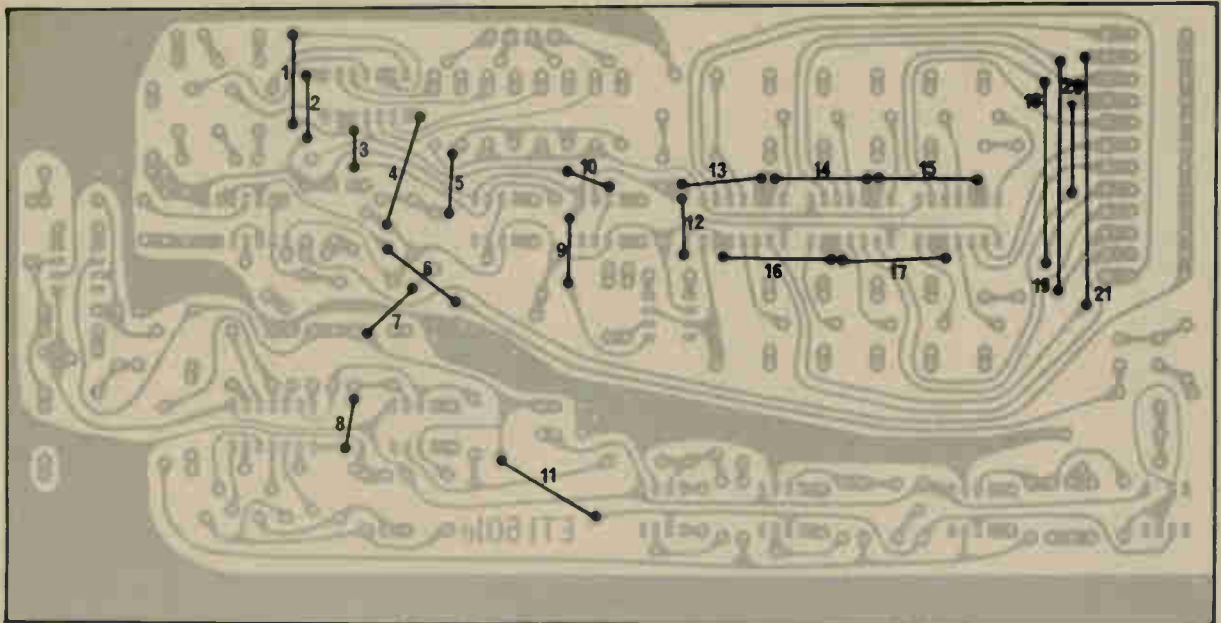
Linking for keyboard controller. This should be installed before fitting components.
